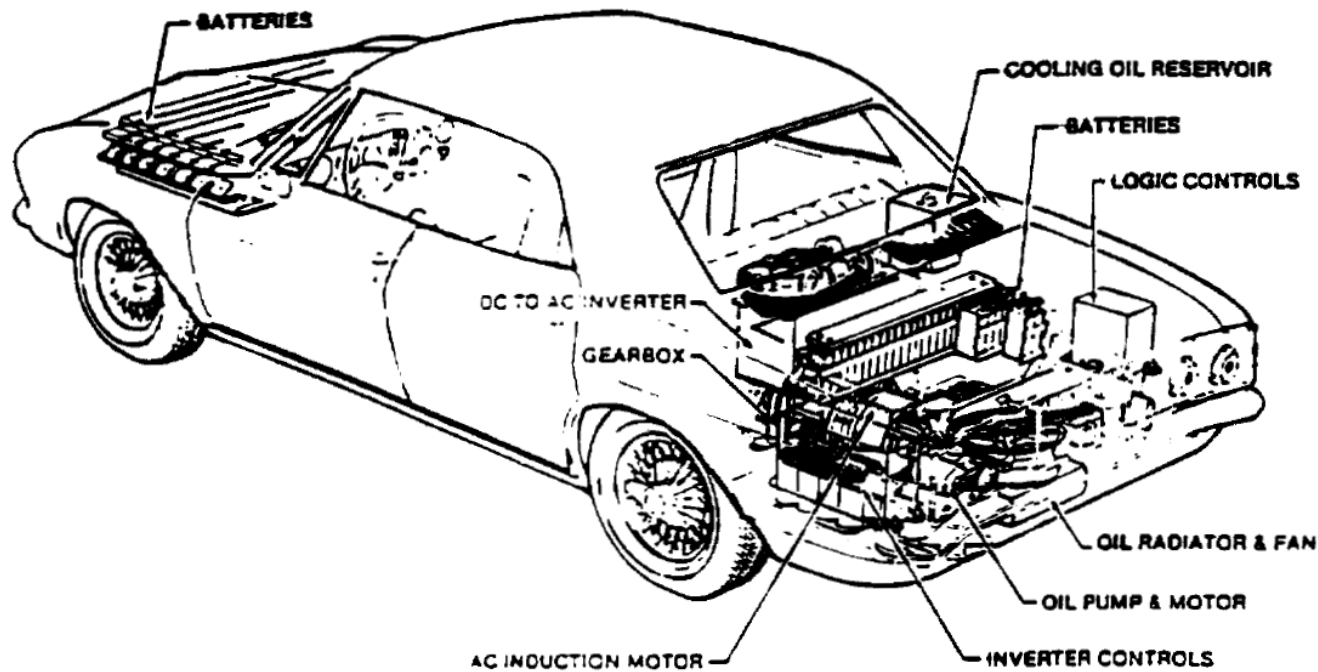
CUTAWAY VIEW OF GENERAL MOTORS ELECTROVAIR
